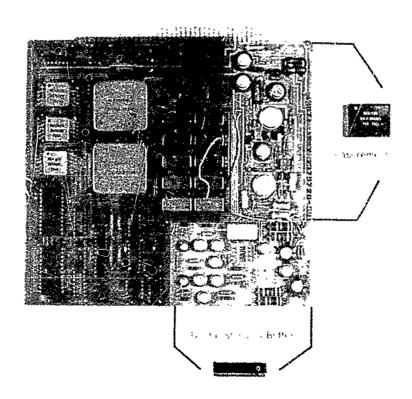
UNIVERSAL TEST POINT BOARD (EARLY VERSION)
